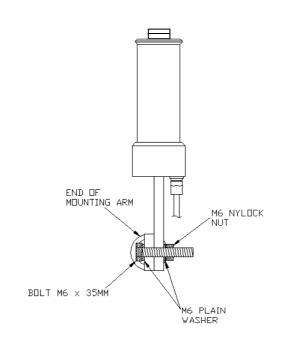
Mounting the Sensor on a CSD3 Mounting Arm
